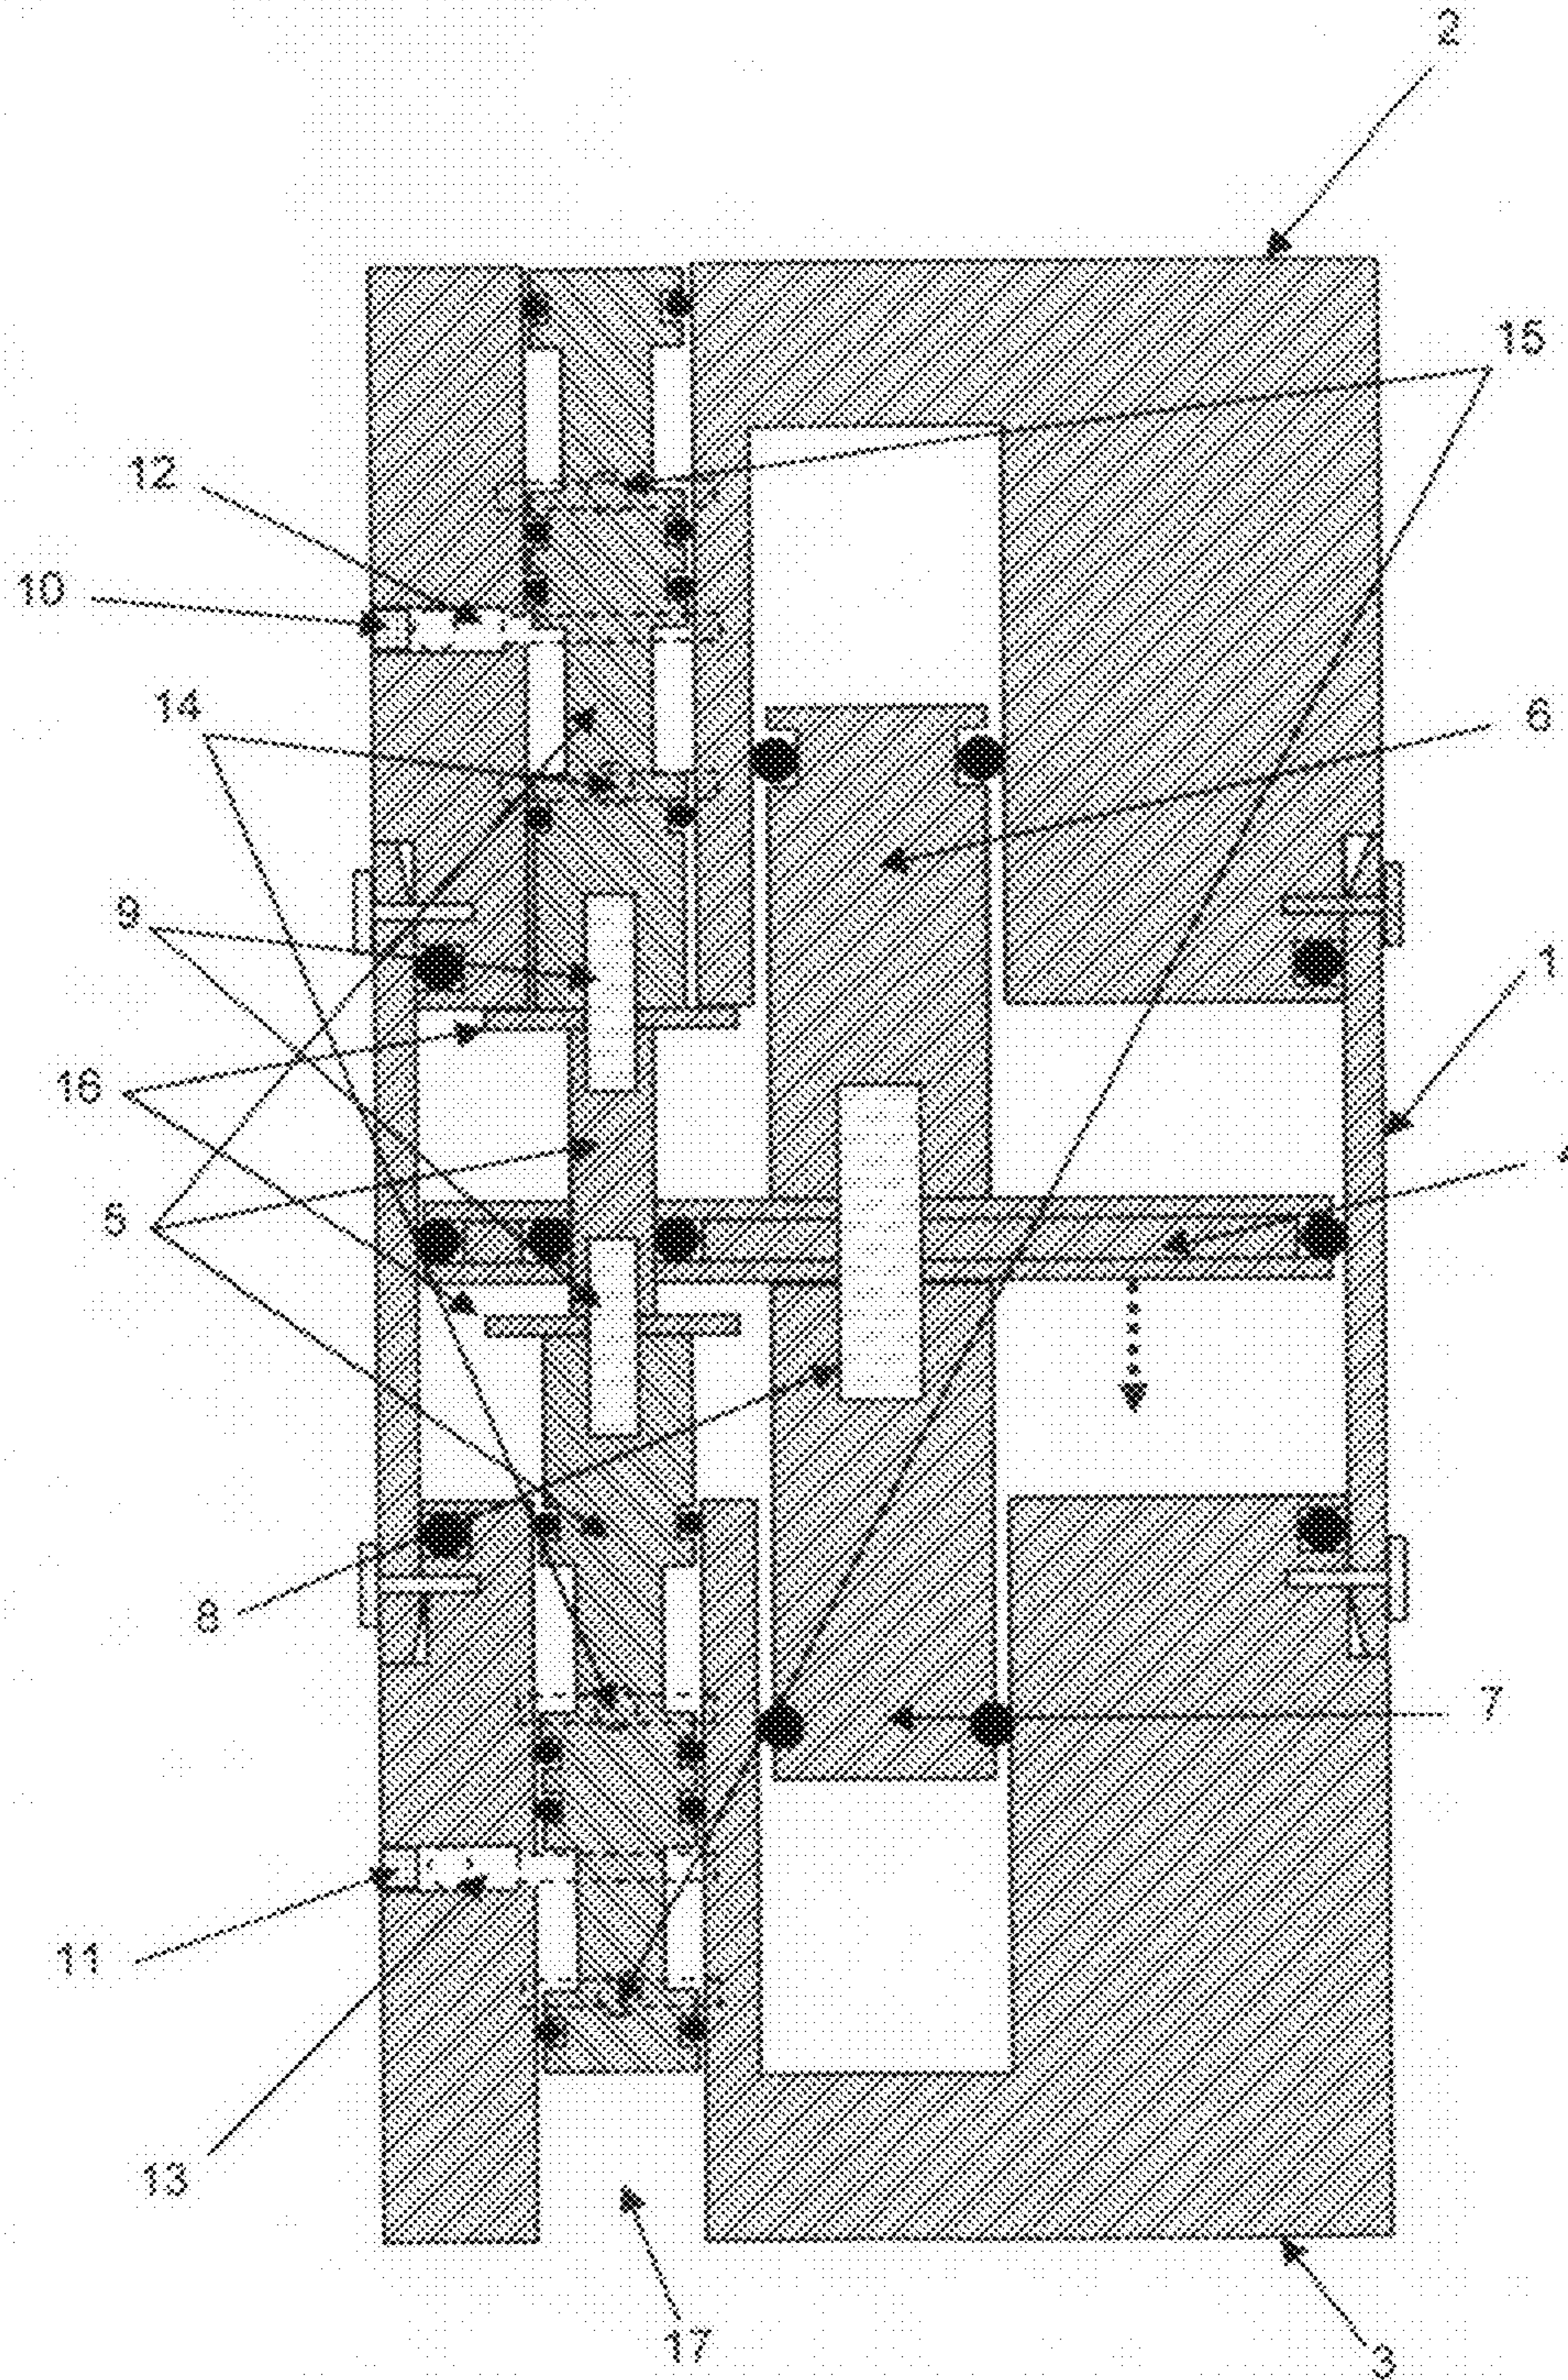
View of the Input Fluid Piston, the Two Output Fluid Pistons, and the Pilot Valve Assembly
